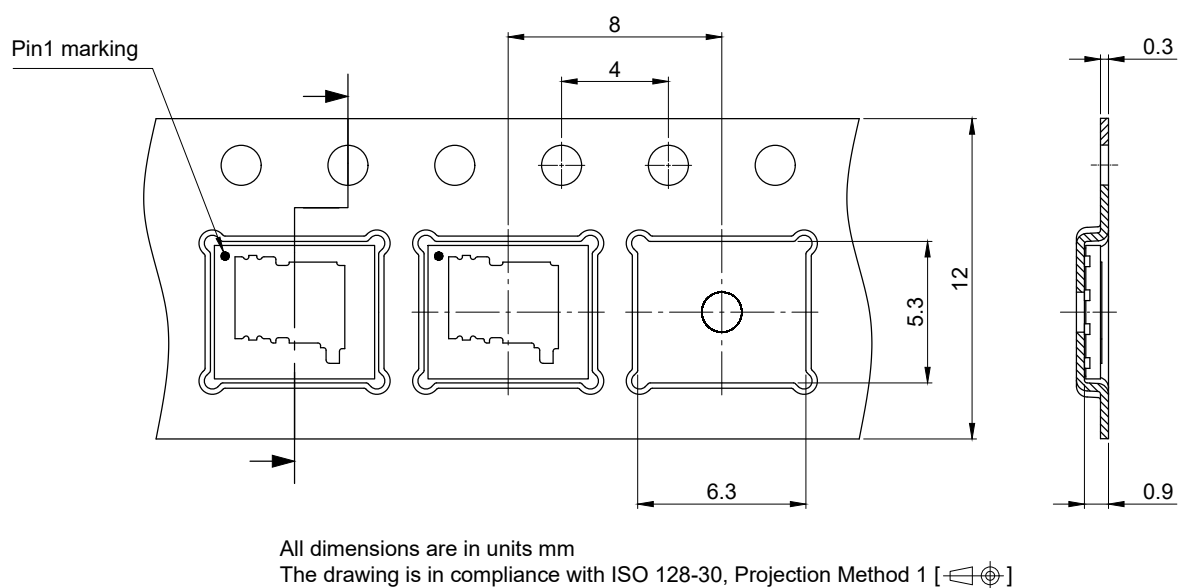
Packaging variant PG-WSON-8, dimensions in mm
